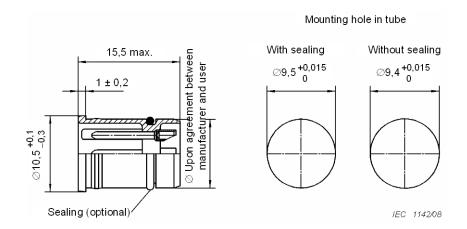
Tube insert, male contacts, mounting without thread (thread on tube)
